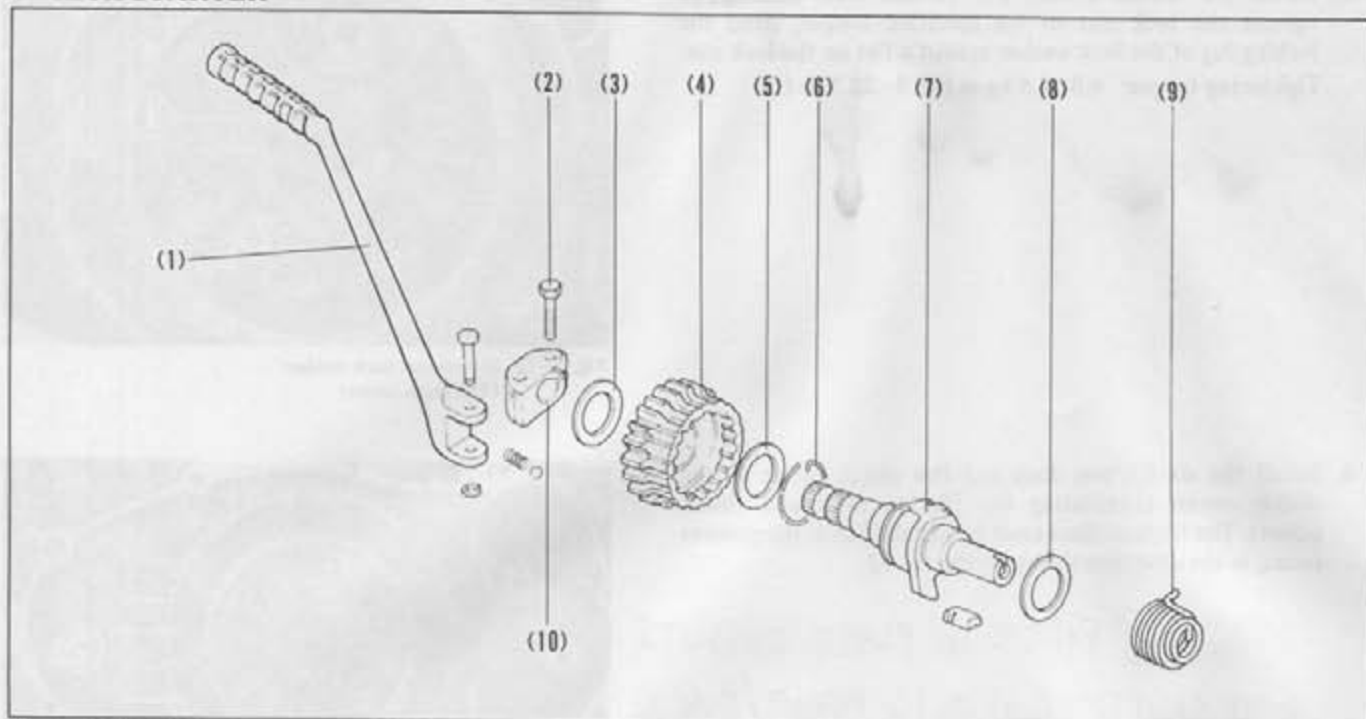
(1) Kick starter arm (4) Starter pinion (24 teeth) (7) Starter shaft (10) Kick arm joint
